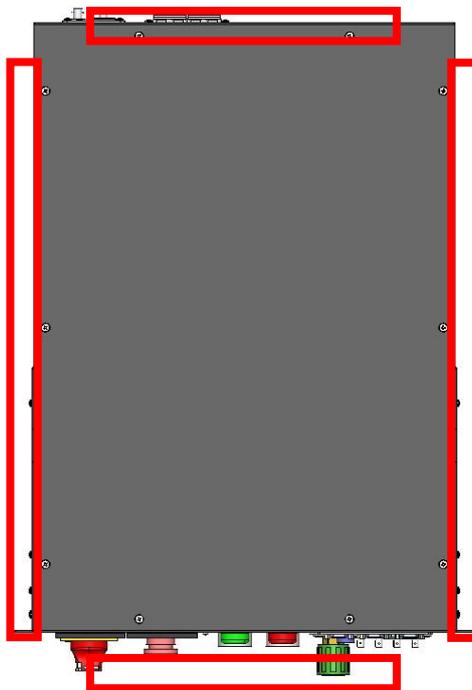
Location diagram of the cross recessed pan head screws on the upper cover plate
